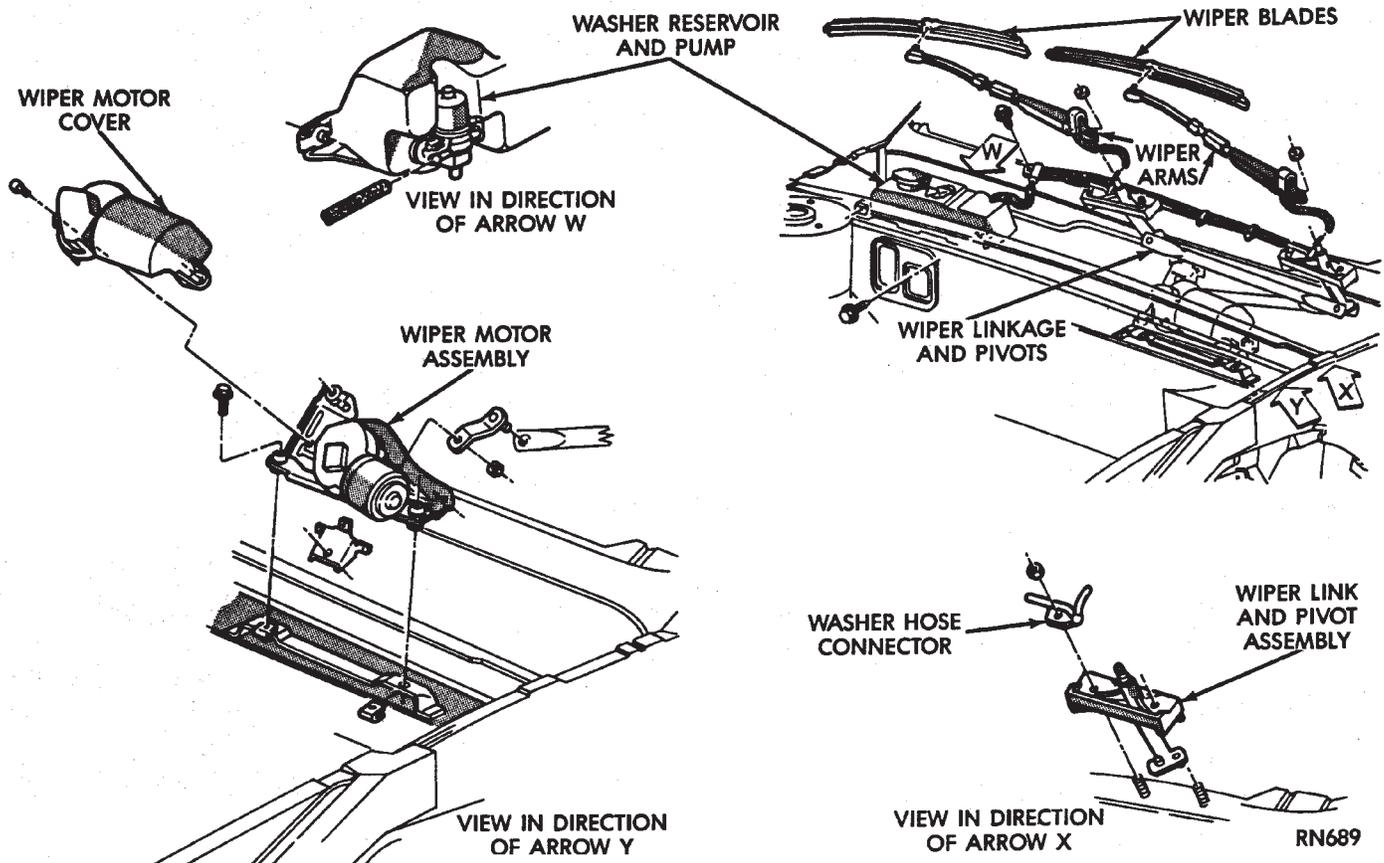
Windshield Wiper Motor and Linkage—AP BODY
